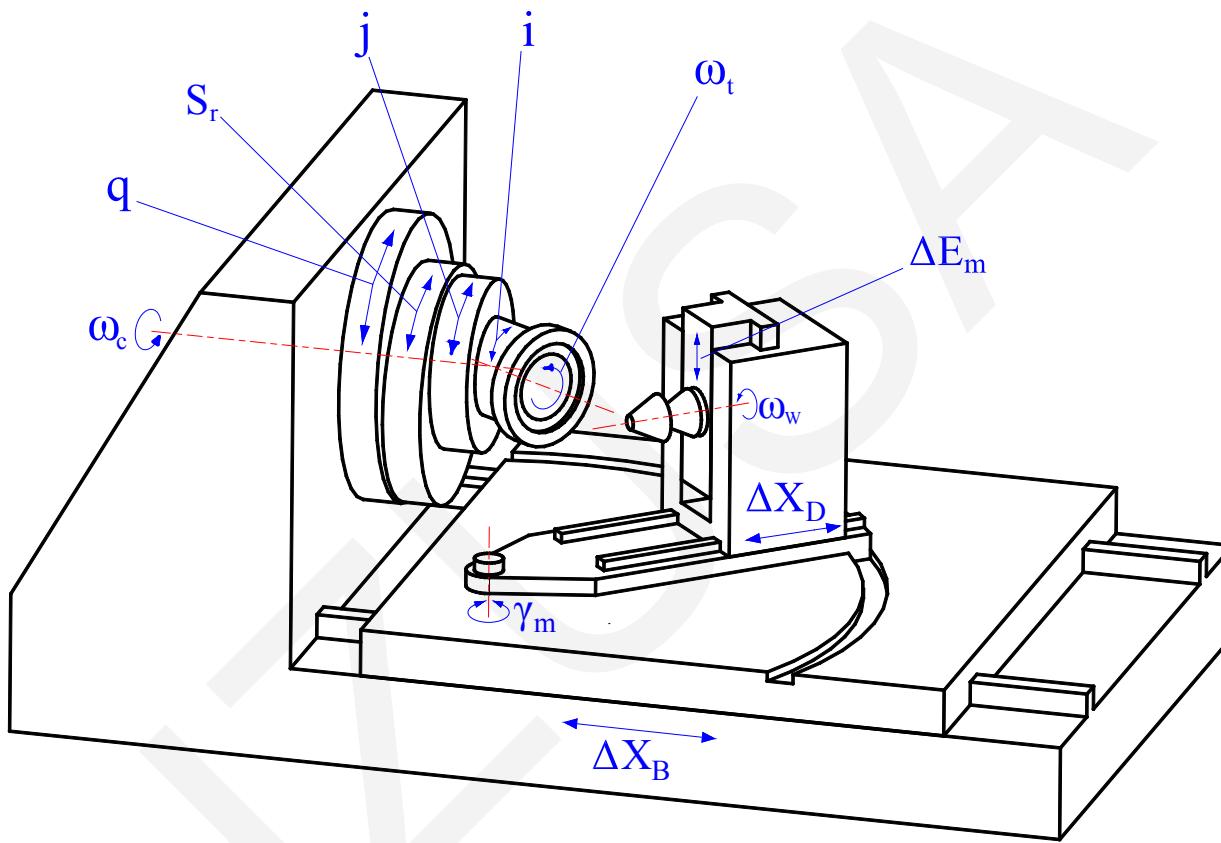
The machine-tool settings of the universal machine tool for processing hypoid gears.
